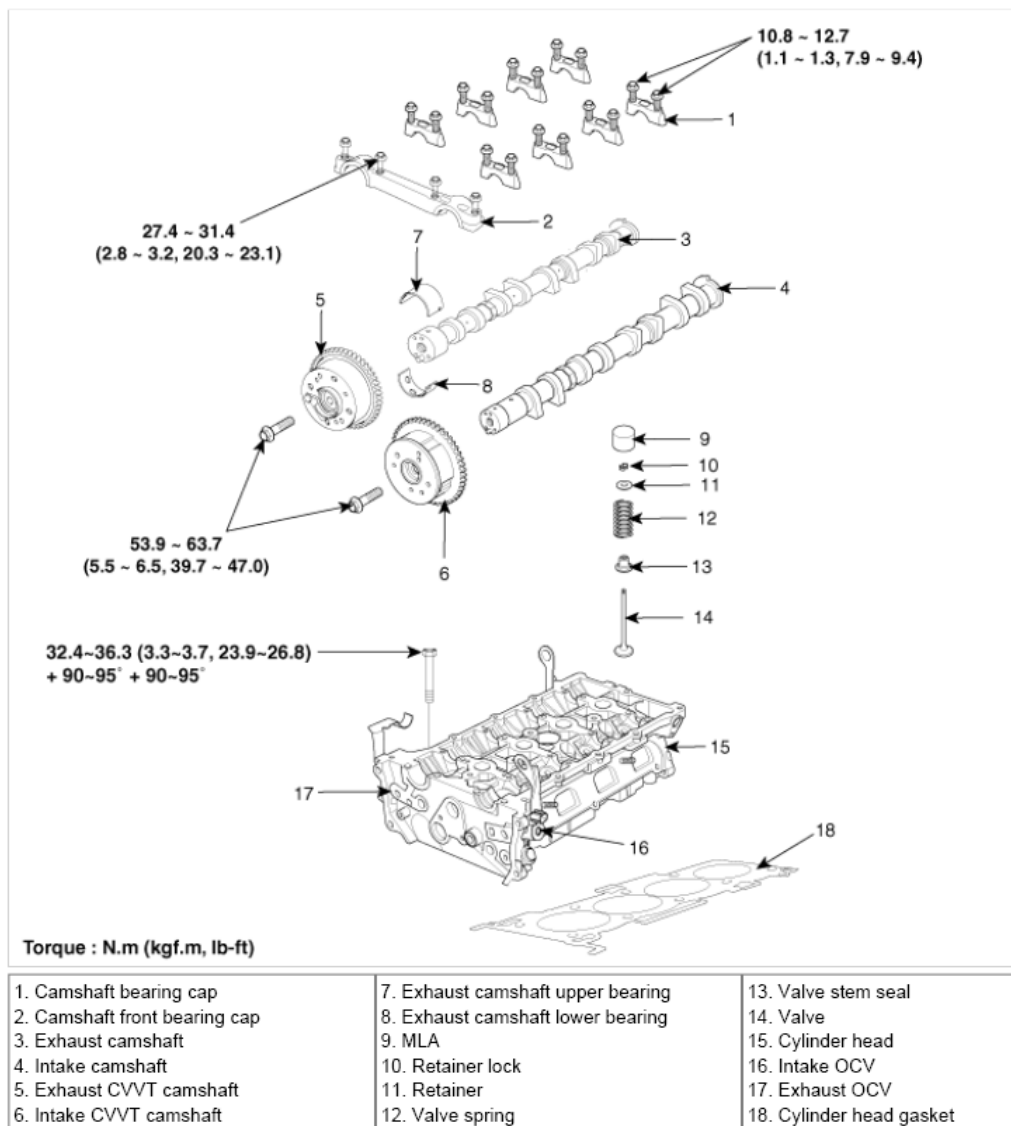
Identifying Cylinder Head Components With Torque Specifications
